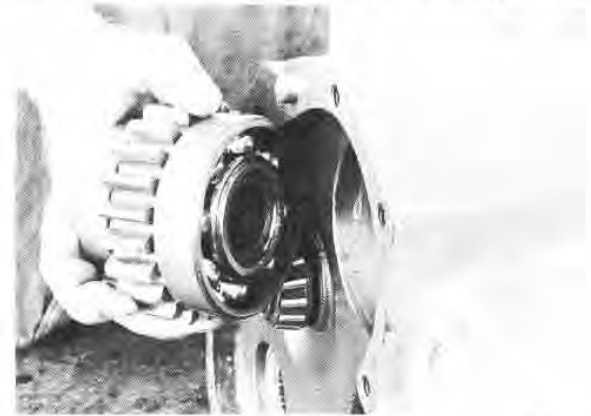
P.T.O. Driving Gear Inner Bearing Assembly (if fitted)
